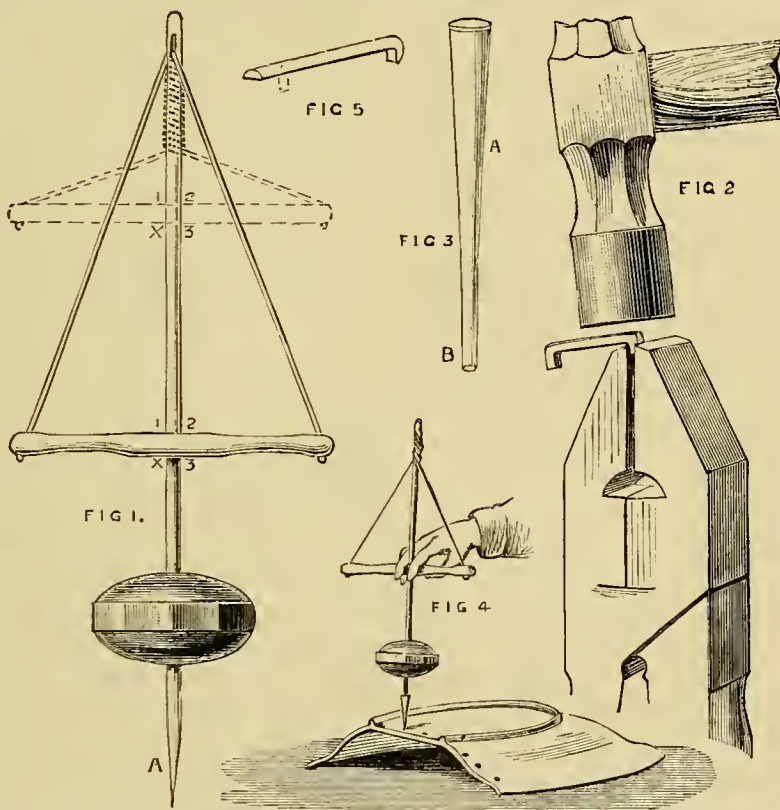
THE DRILL—A, Cone to receive Socket shown in Fig. 3. FIG. 2.—MODE OF FORMING RIVET WITH HAMMER AND PLIERS. FIG. 3.—DIAMOND DRILL—A, Tin Socket; B, Diamond. FIG. 4.—POSITION OF DRILL AT WORK. FIG. 5.—CLASP OR RIVET.
